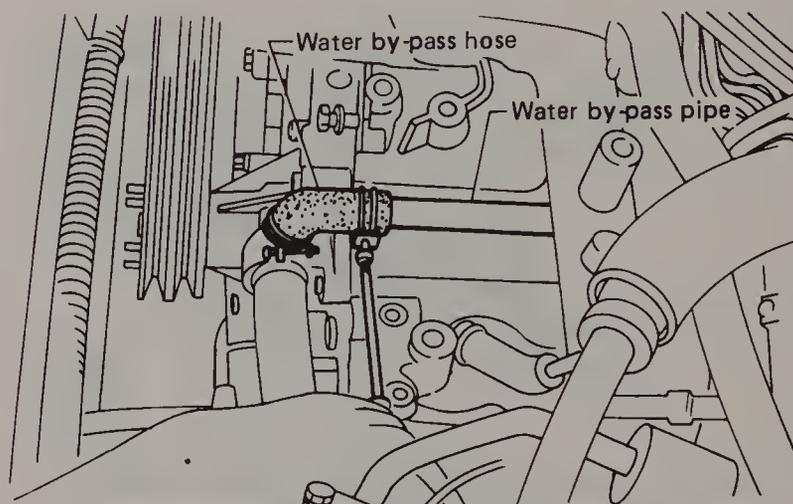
Disconnect the water pump bypass hose from the bypass pipe (Sec 6)
